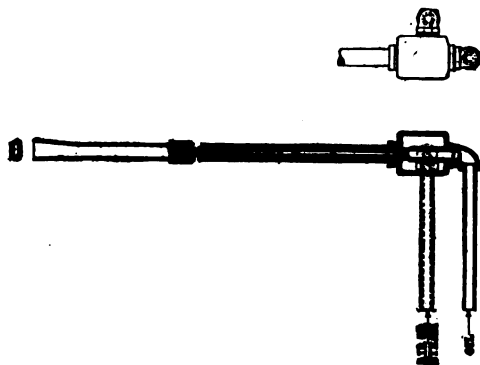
OIL BURNER FOR OPEN HEARTH FURNACES.
